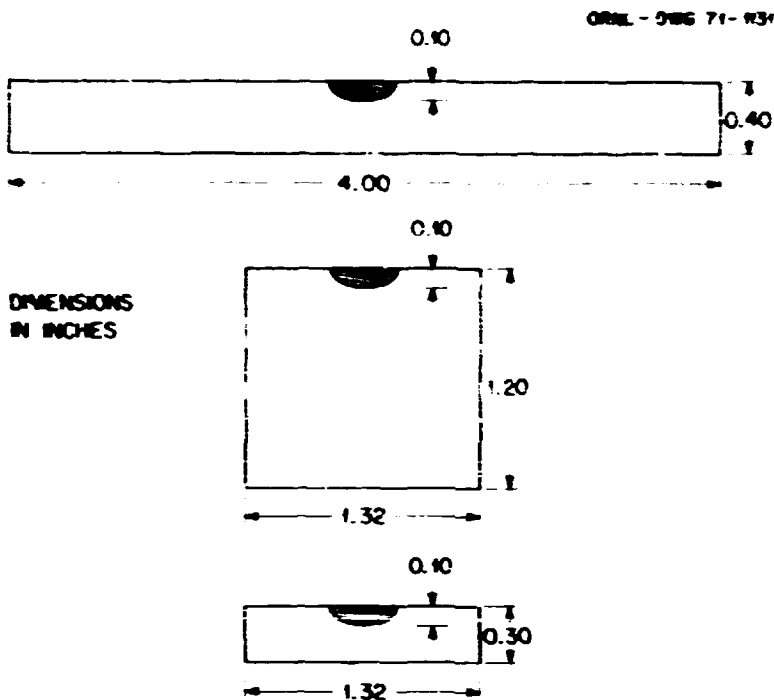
Specimen cross sections to be tested to study effects of shape of cross section and of the ratio of the crack area to the gross area.
